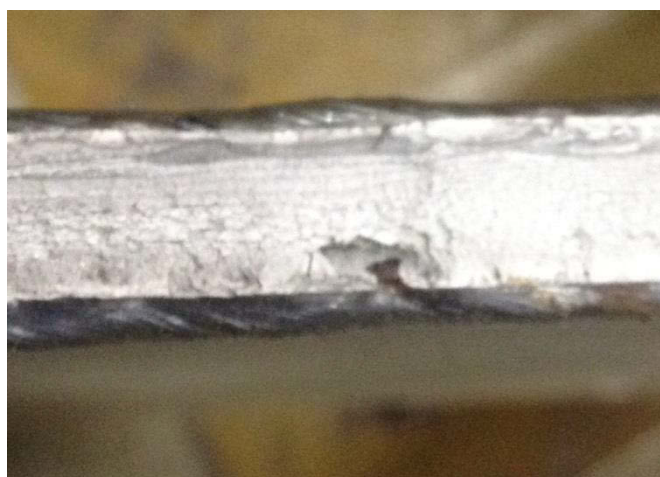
Major defects and porosities in welds material that led to ignoring some specimen test results
